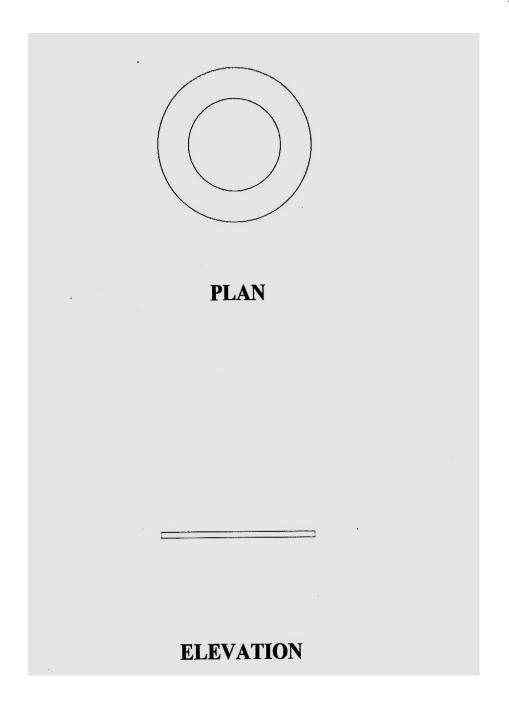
Sketch of Compressor Washer (plan and elevation)
